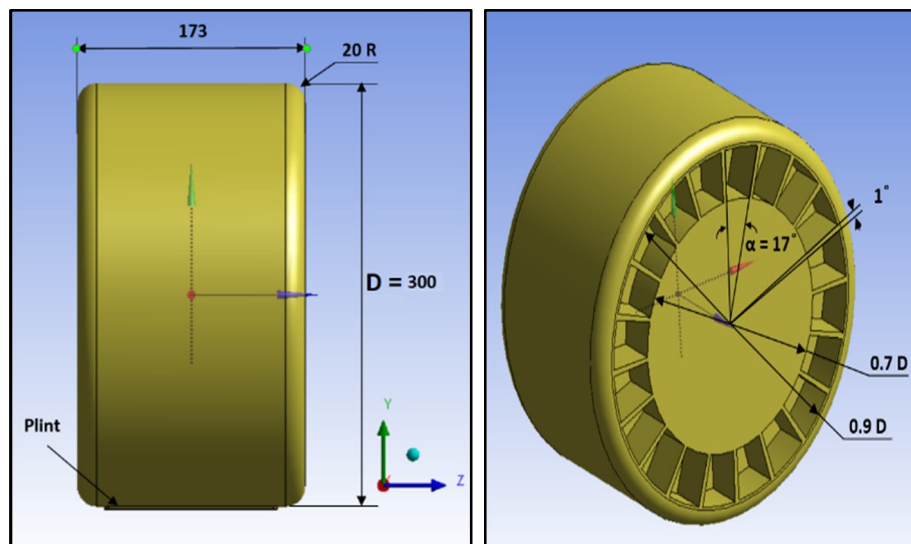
The 3D construction drawing of typical NPT wheel at (α) = 17 degrees (all dimensions in mm).
